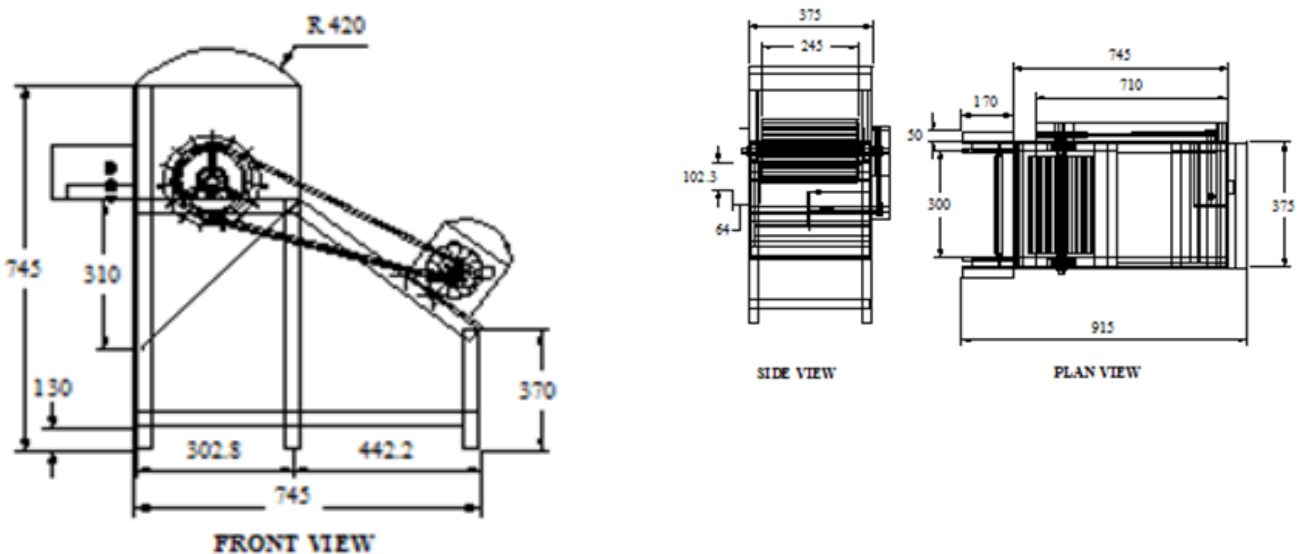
Isometric Drawing of Plantain Fibre Extraction Machine
